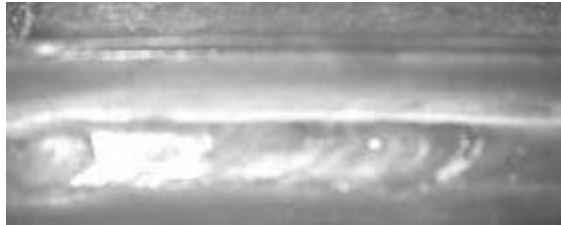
Flare-bevel weld in 3.0-mm sheet steel produced by Fabricator B
